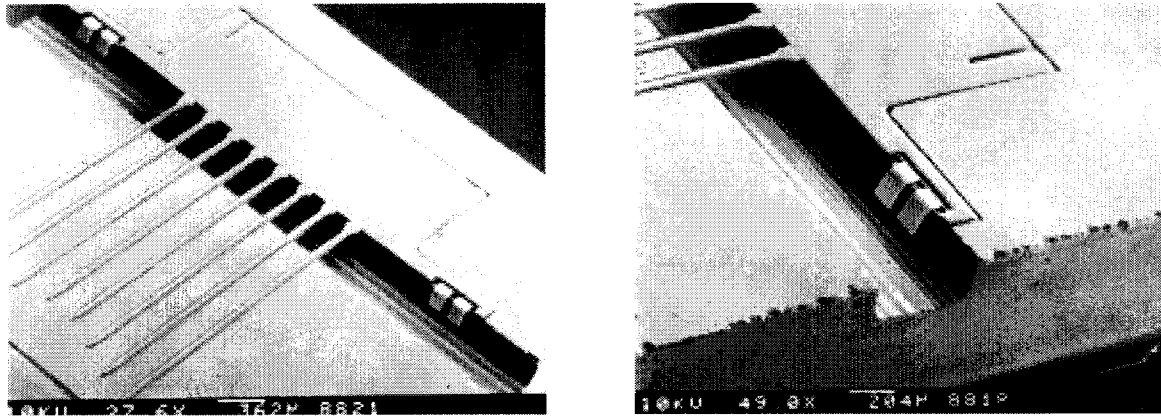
View of a 3D probe held in a micromachined jig used to bend the lead transfers prior to insertion in the platform.
